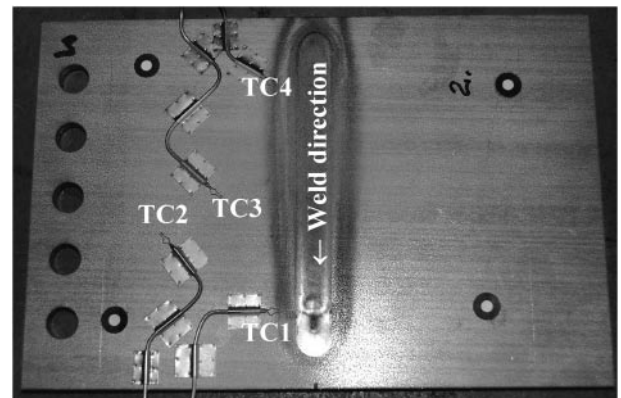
Plate instrumented with thermocouples (TC1–TC4) after welding
